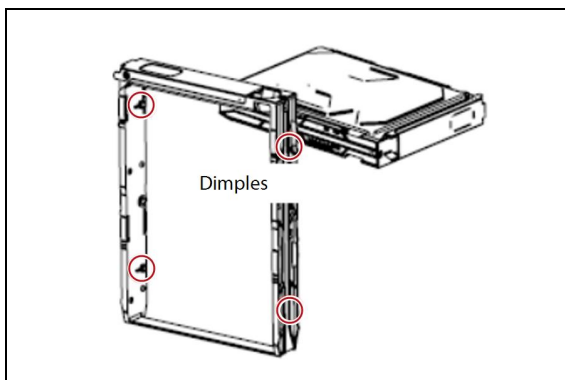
Match the dimples on the drive sled to the dimples on the drive.
